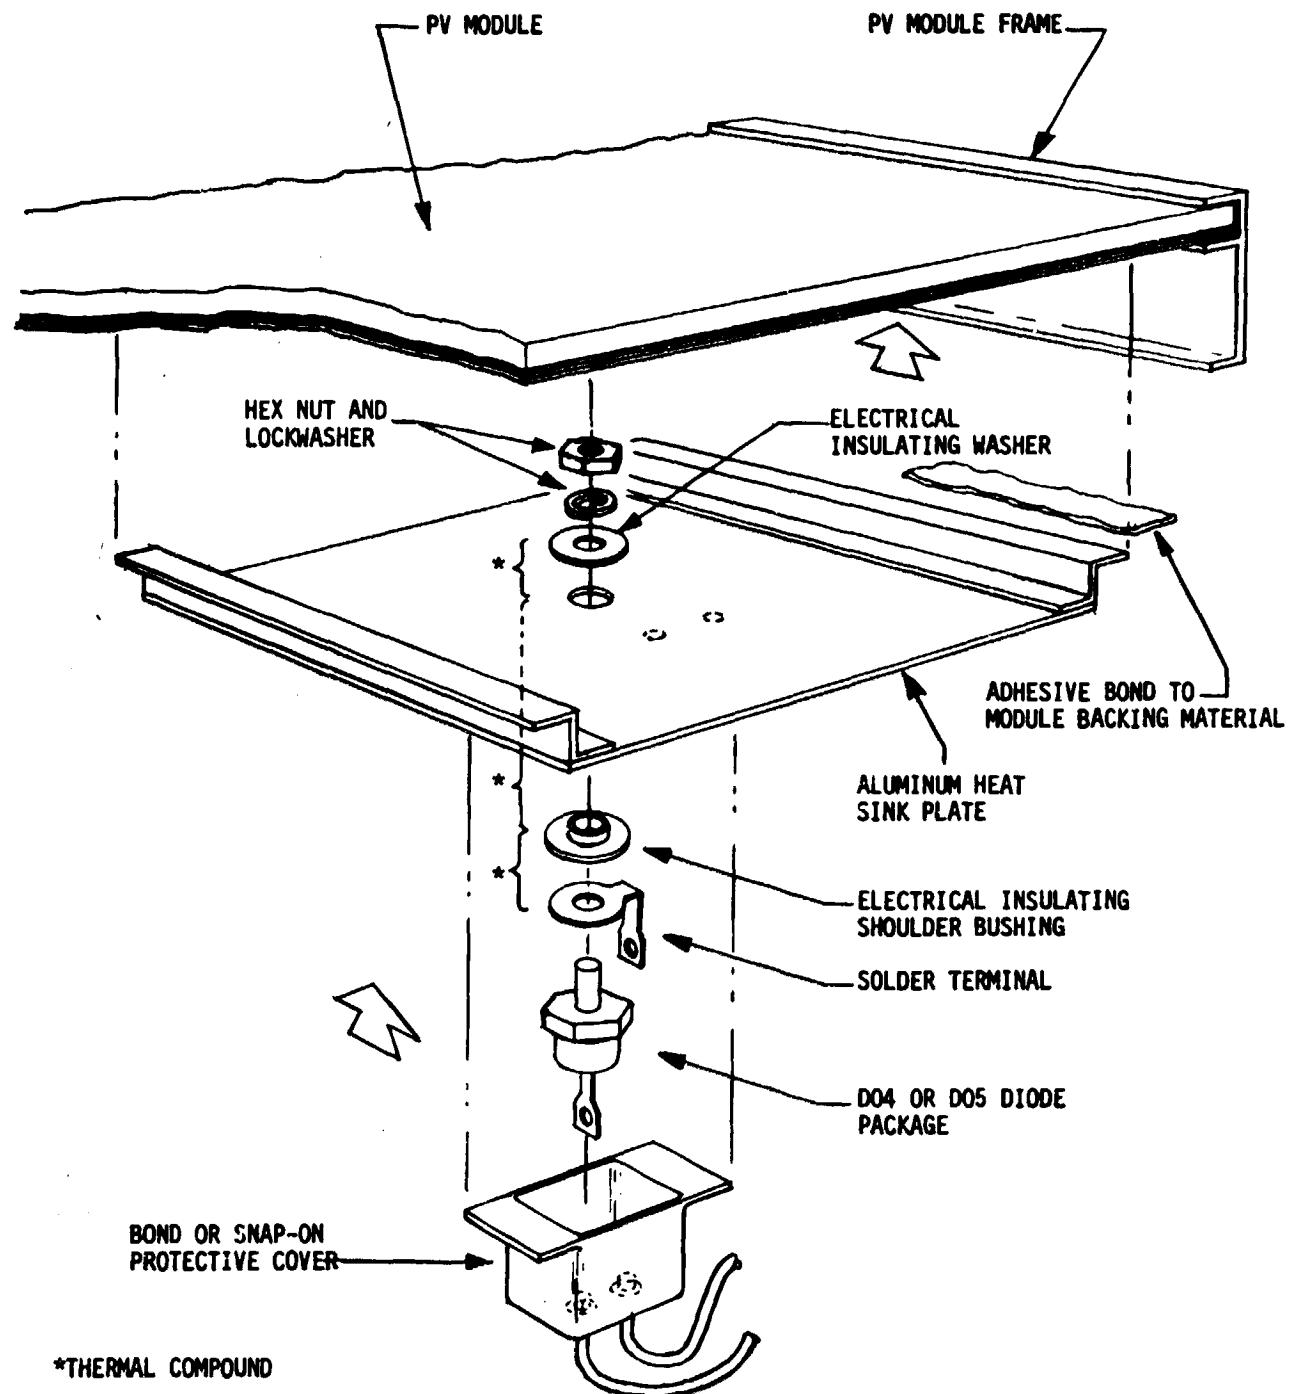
D04 or D05 Diode Package Mounted to Back of PV Module
